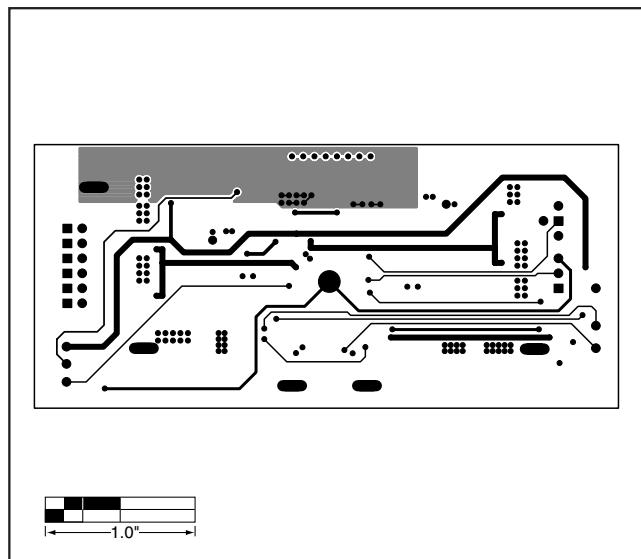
MAX8760 EV Kit PC Board Layout—Internal Layer 3—Signal Layer
